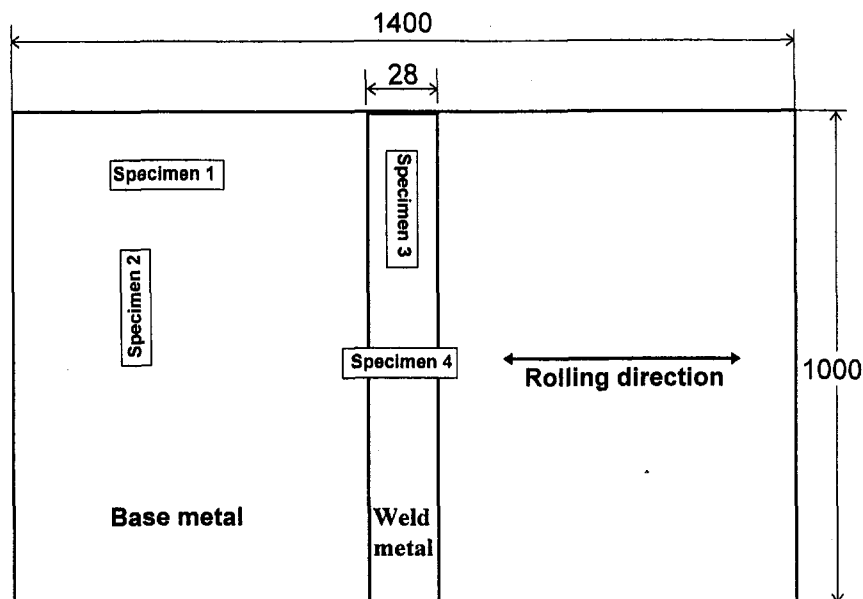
Position and orientation of specimens inside the welded plate (dimensions in millimeters)
